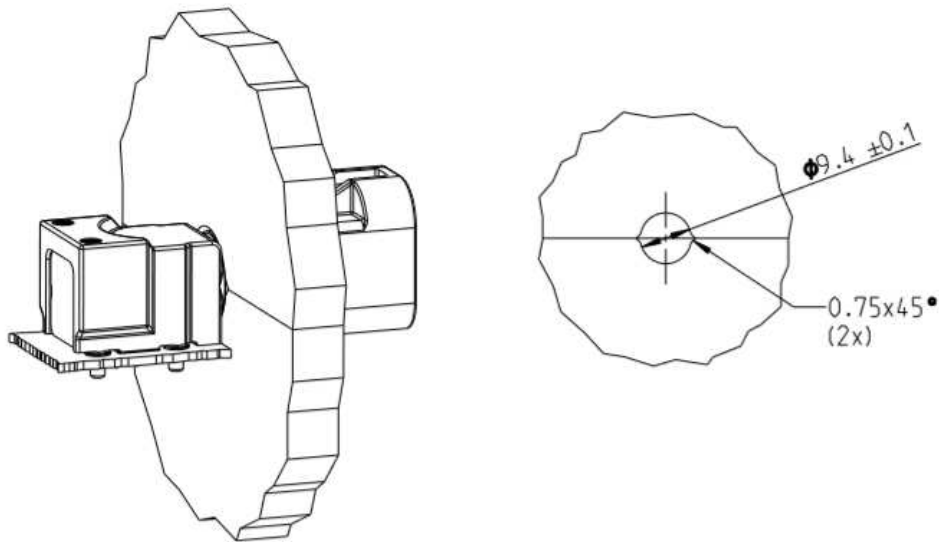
/ Bild 13: Mountingsituation Header with shielding in device-housing /
